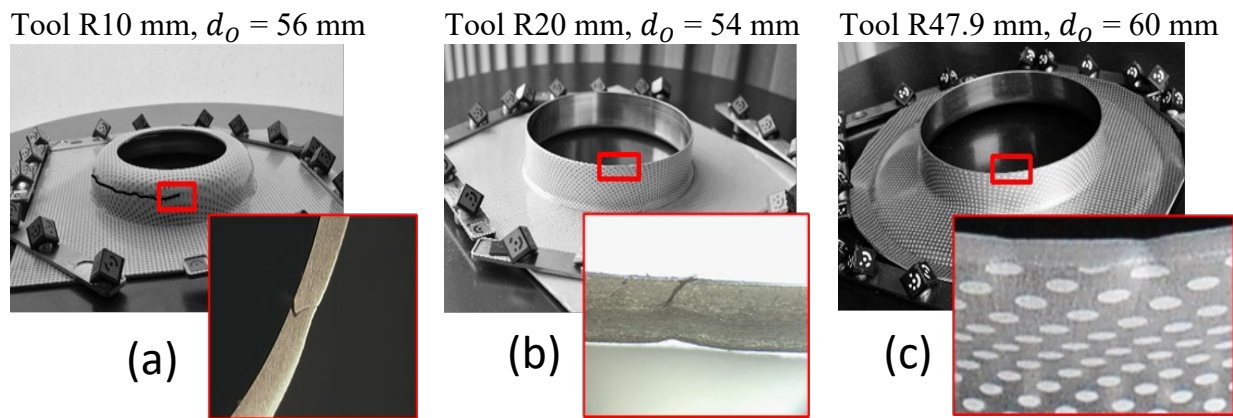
Failed tested specimens and fractographies with x20 magnification: (a) SPIF with 10 mm tool radius, (b) SPIF with 20 mm tool radius, and (c) conventional press forming.
